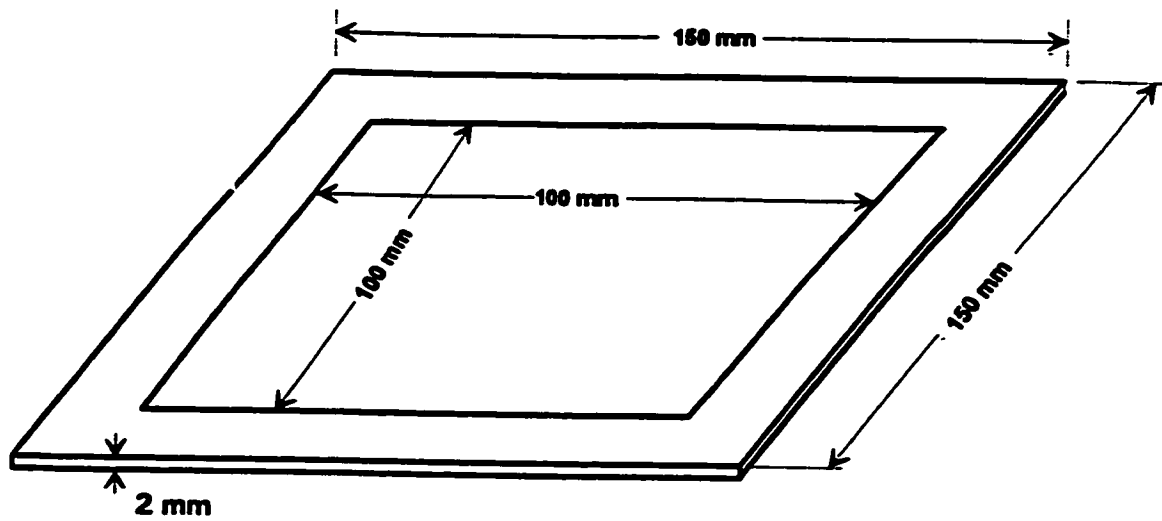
Teflon coated aluminum plates used in the simple shear box
